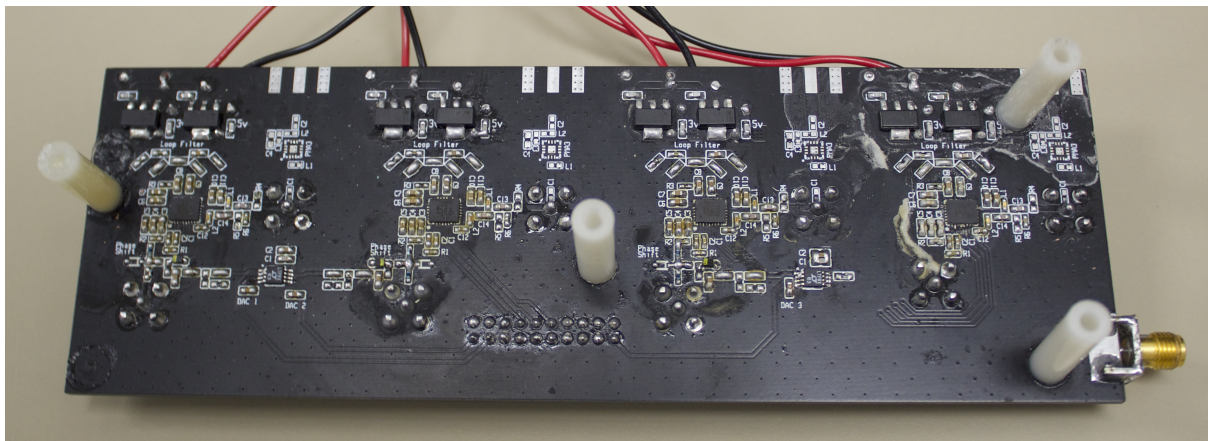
Assembled DLL-HPC transmitted signal beamformer PCB - component side
